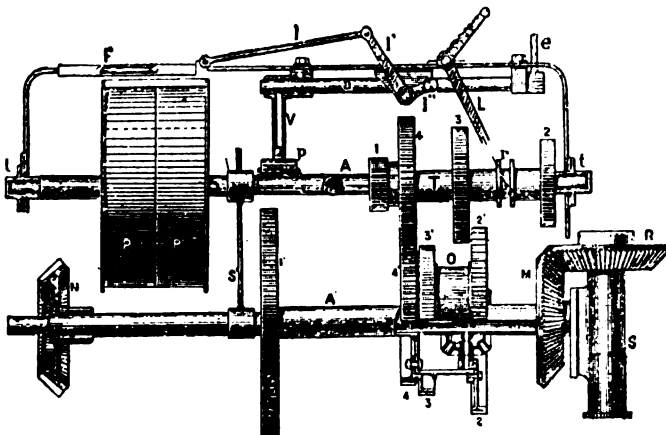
THE DE DIETRICH VARIABLE SPEED GEAR.
